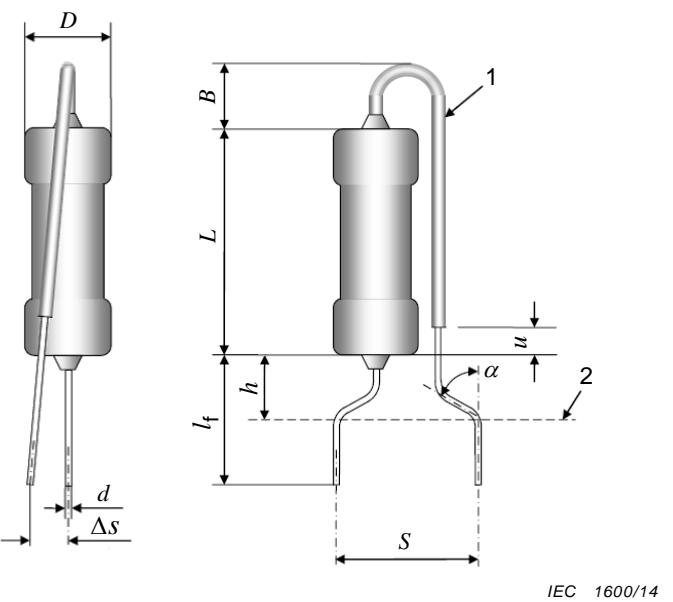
, Figure B.4 and Figure B.5 show the shape and dimensions of radial formed resistors with upright body position.
